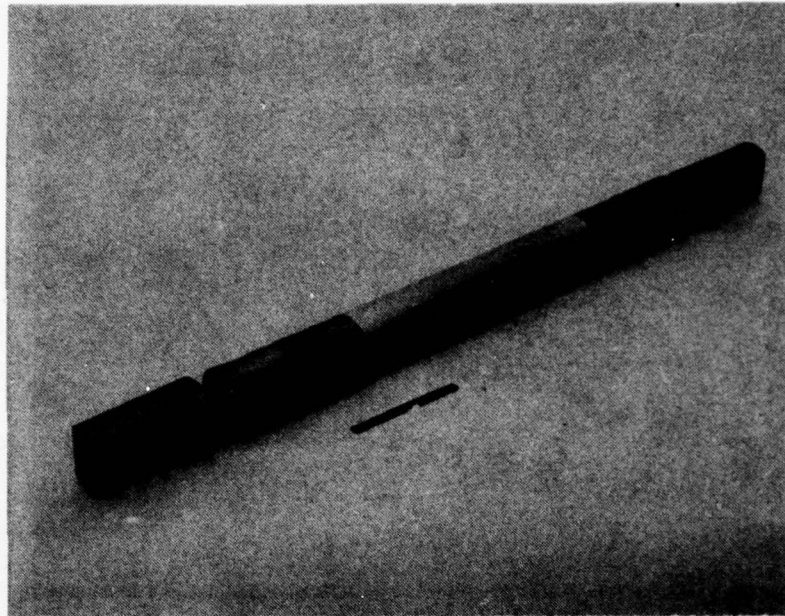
Typical Tube Assembly and End Fittings Before Welding
